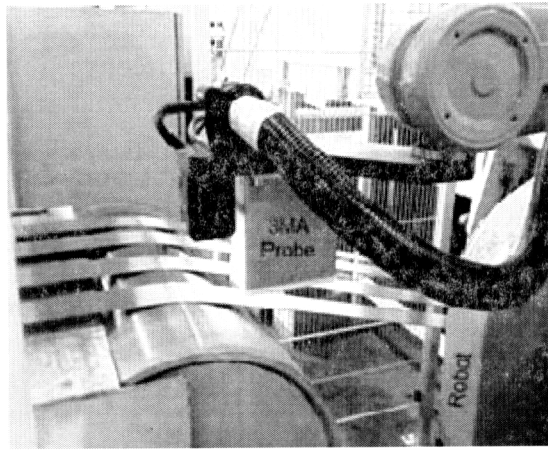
Sensor holder and table carrier of the micro-magnetic in-line sheet inspection system
